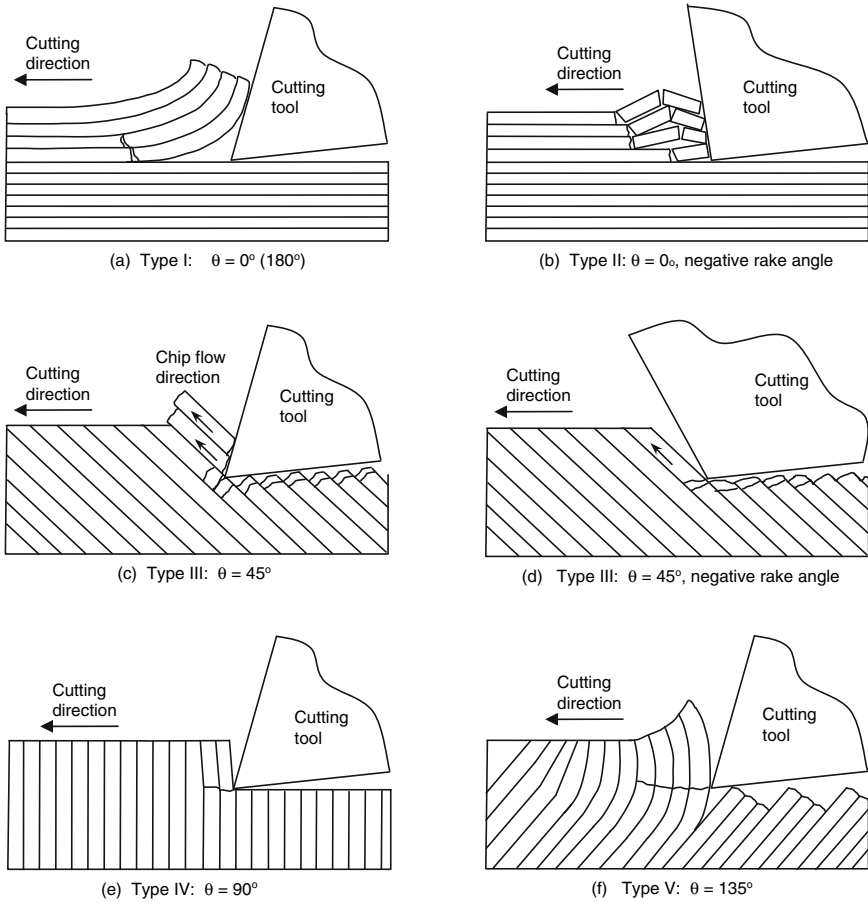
Cutting mechanisms in the orthogonal machining of CFRP with a sharp edge [12, 13]
